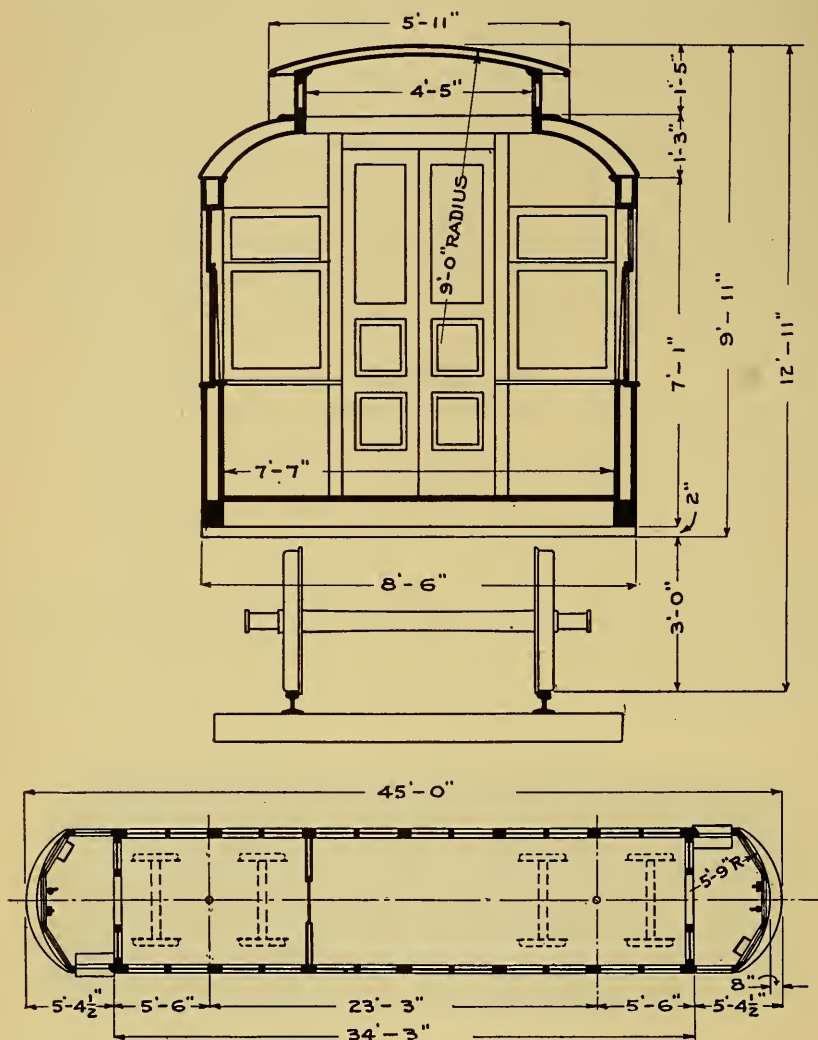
PLAN AND CROSS SECTION OF THE TEST CAR
